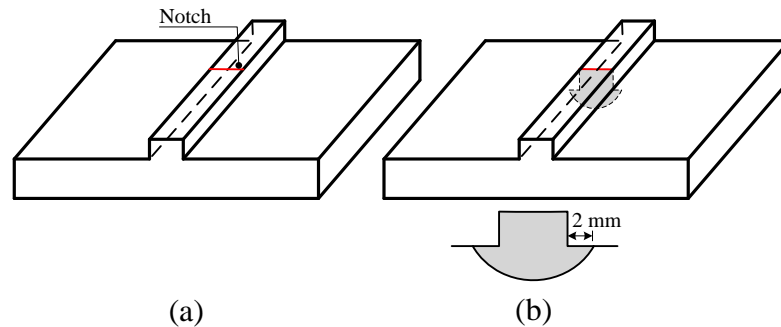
Specimen (a) before fatigue test (b) after first fatigue test with surface crack.
